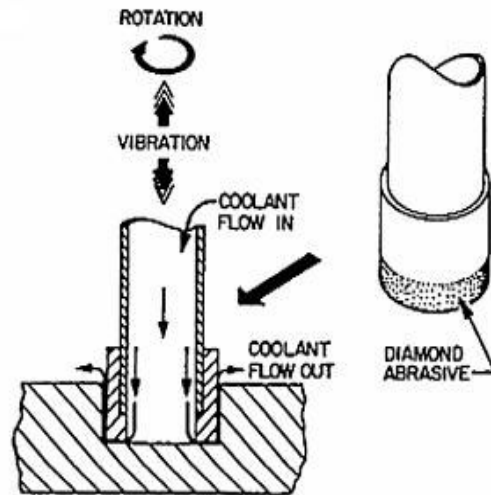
Schematic illustration of rotary ultrasonic machining (RUM) process
